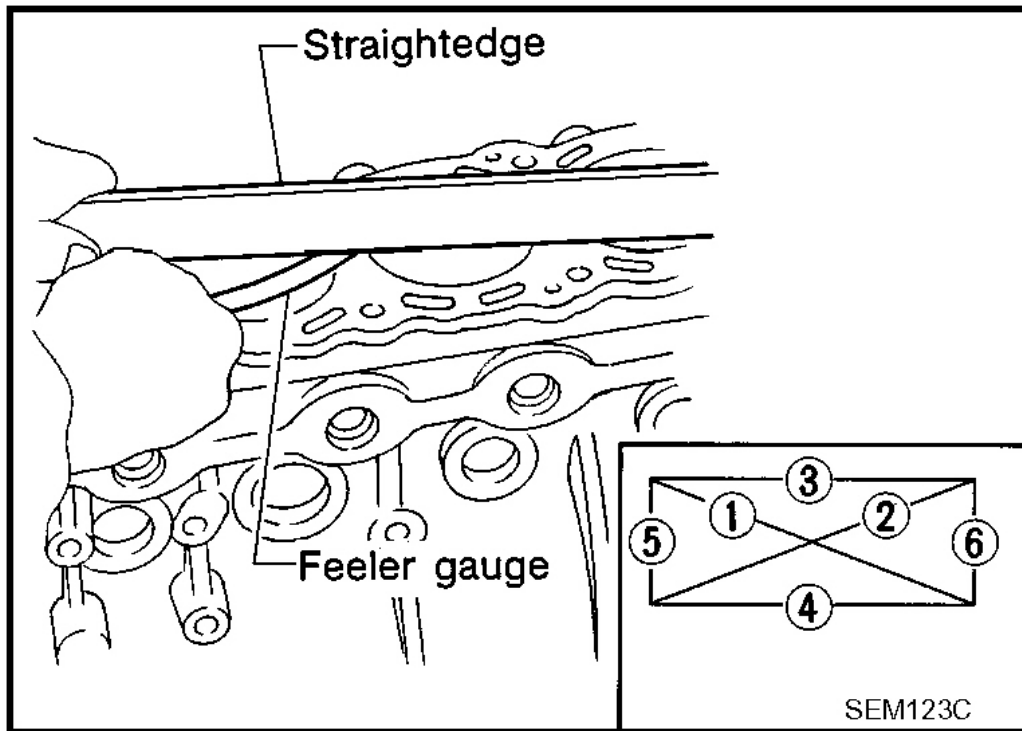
Measuring Distortion On Cylinder Block Upper Face With Straightedge And Feeler Gauge
